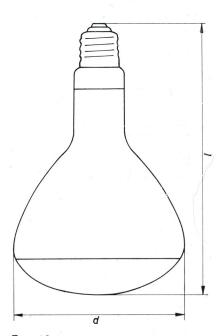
Dimensioned drawing of highpressure mercury-vapour lamps Mushroom shape with reflector and luminescent material
